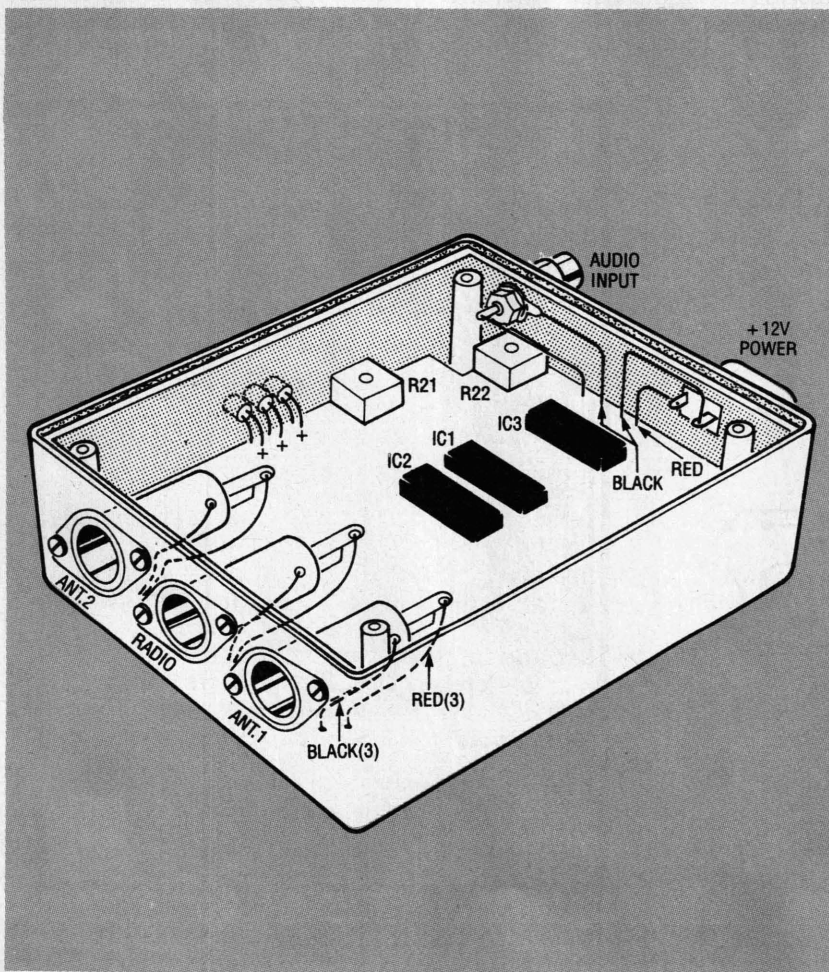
ASSEMBLY AND WIRING OF CASE-MOUNTED components.
